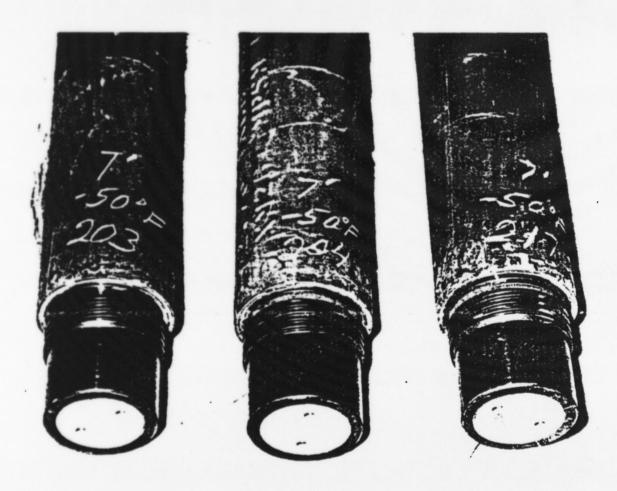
Box 4, -50°F, rd. No. 203, 204, 217. Warhead case pins or rivets sheared and/or elongated the pinholes in the warhead case assembly (PN 9334131) after the base (motor end) and 45° to nose drops.
